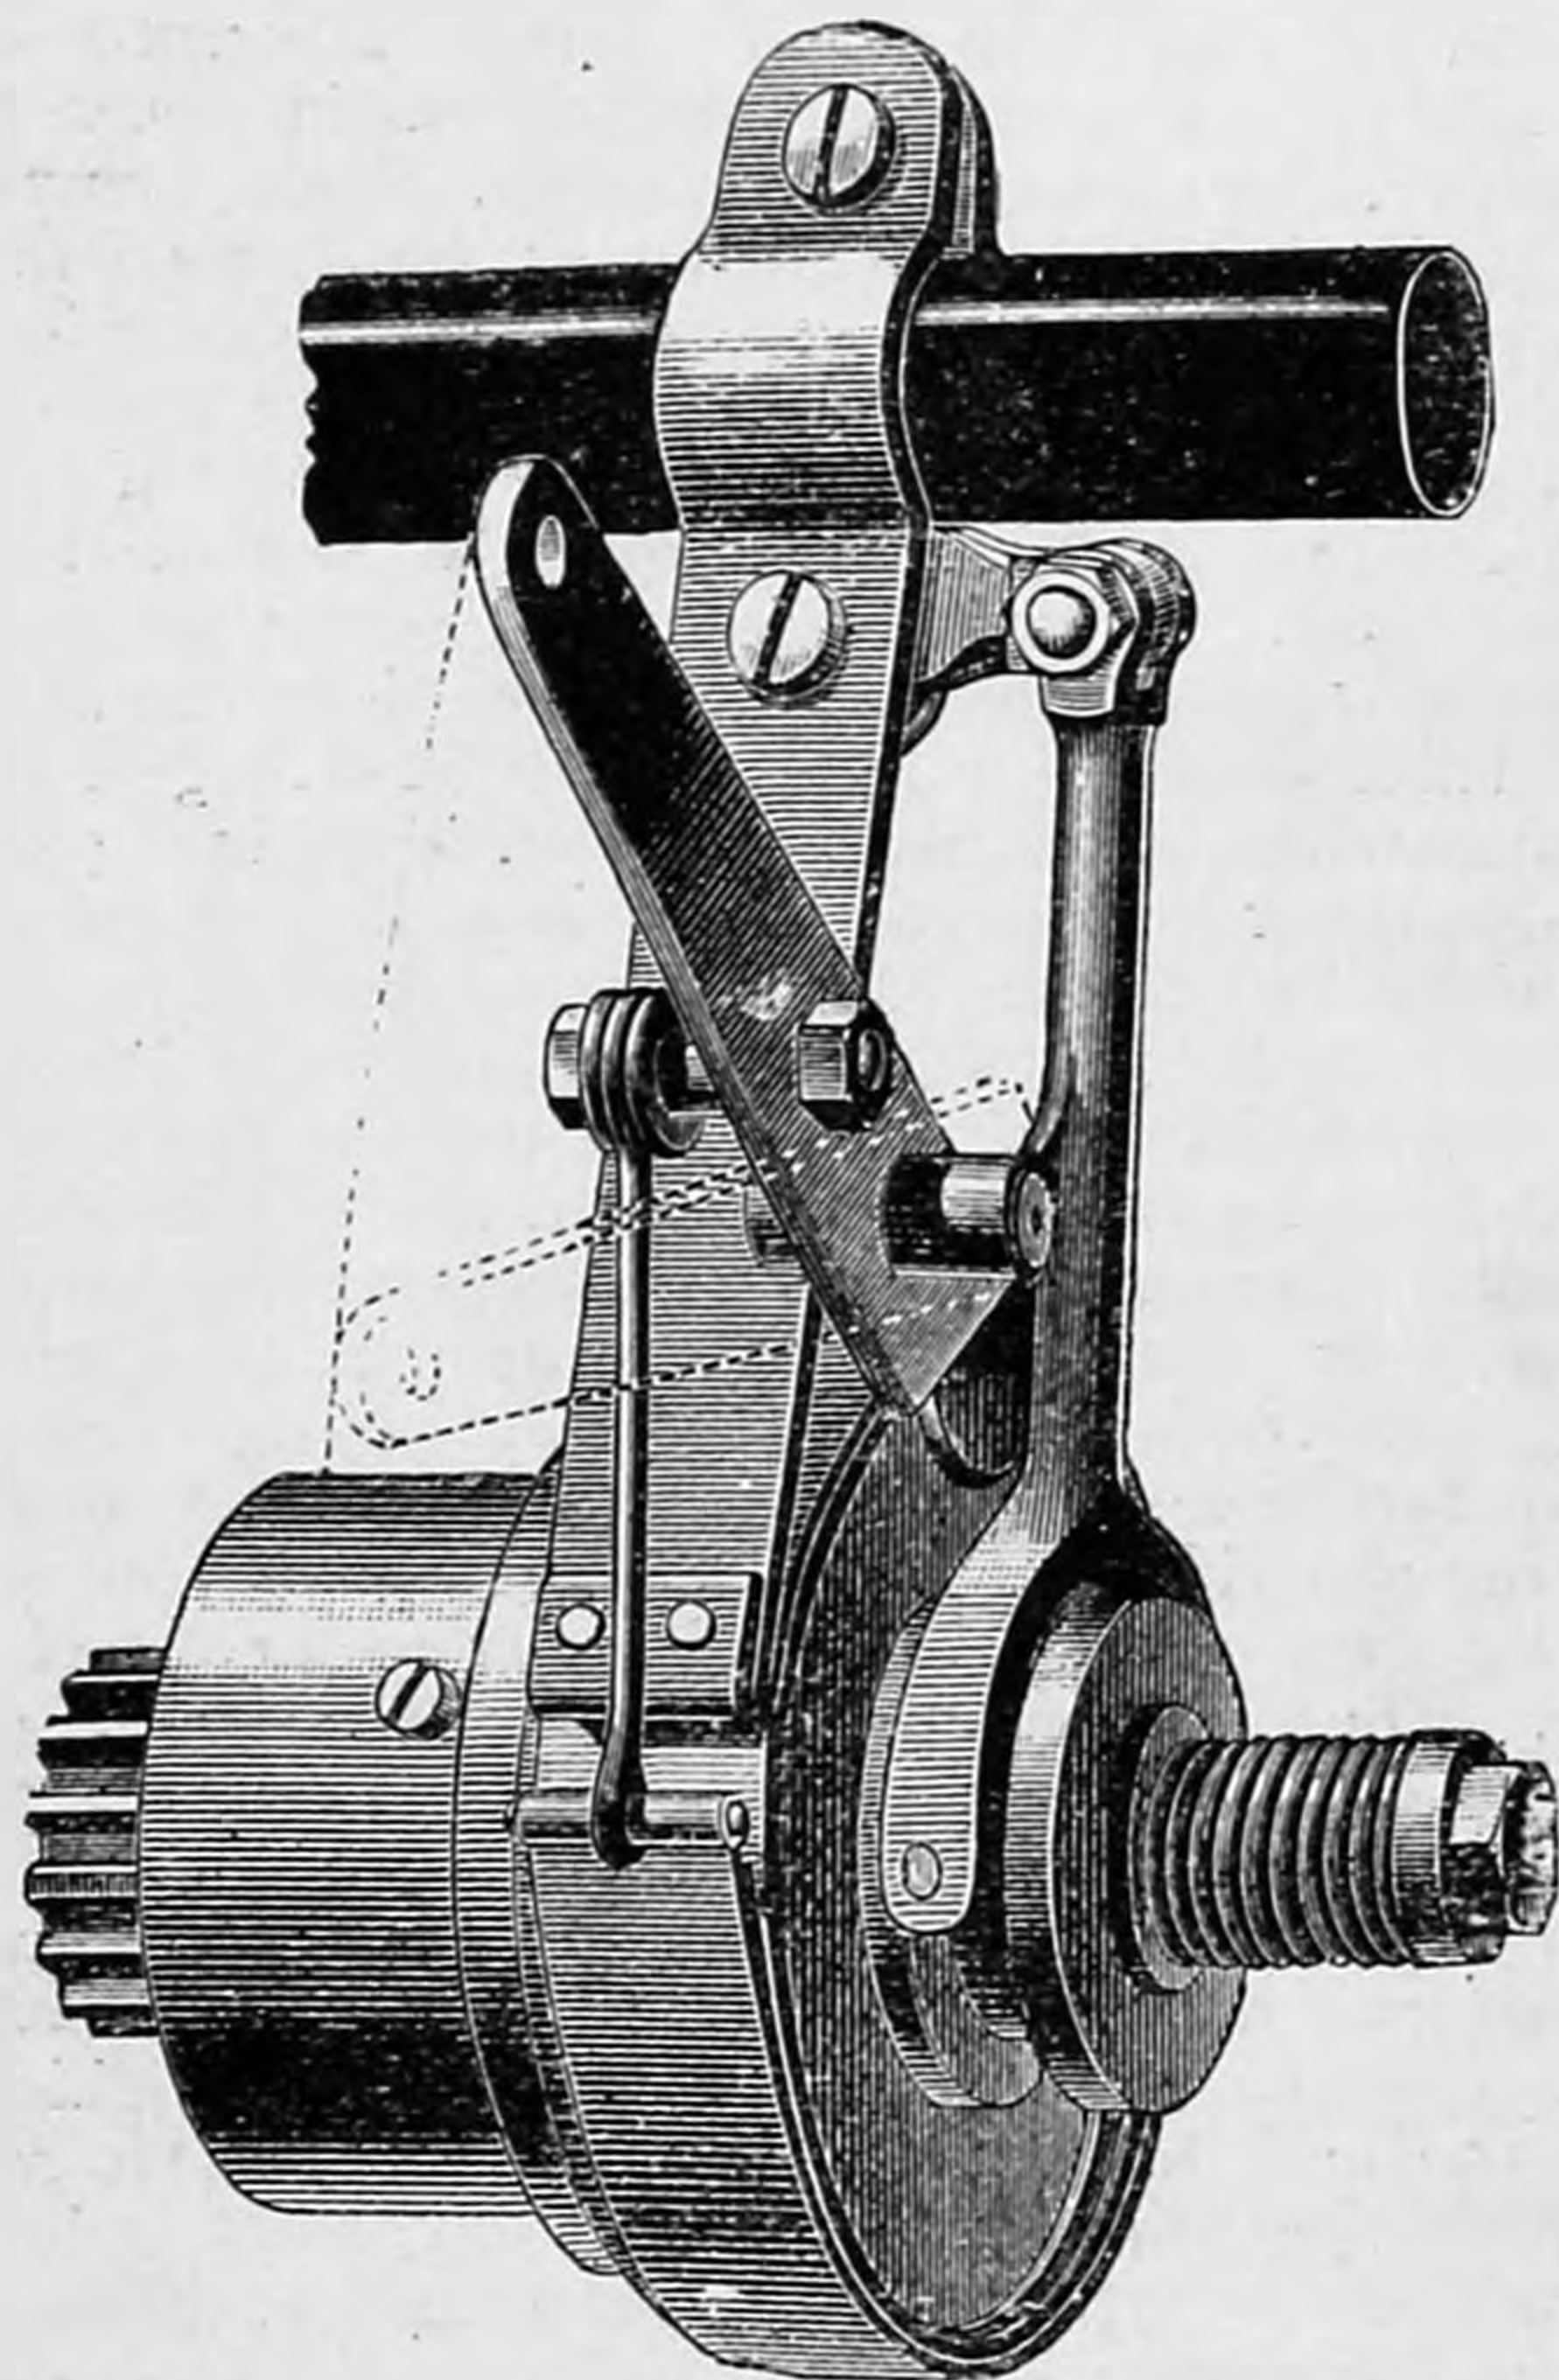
The Dupont Two-Speed and Clutch Gear for Motor Cycles.
